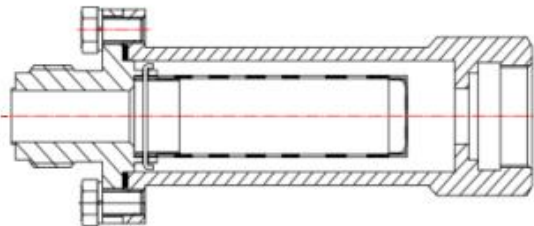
DN4~10 threaded connection turbine flowmeter filter
